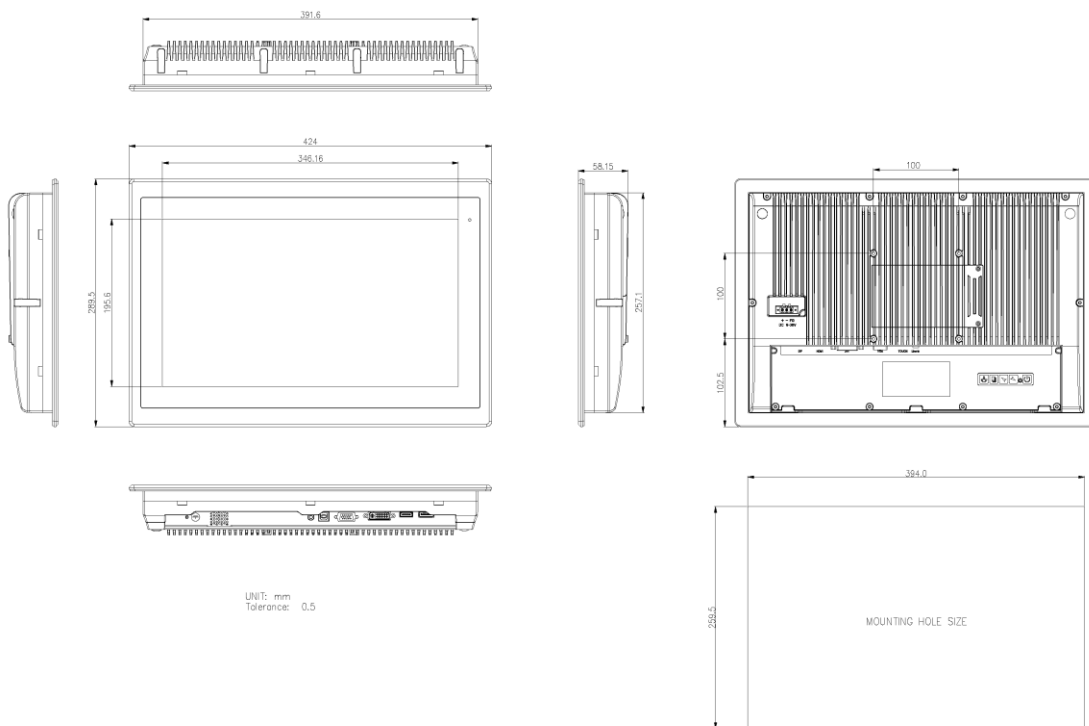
Dimensions of FABS-110PRG(H)
